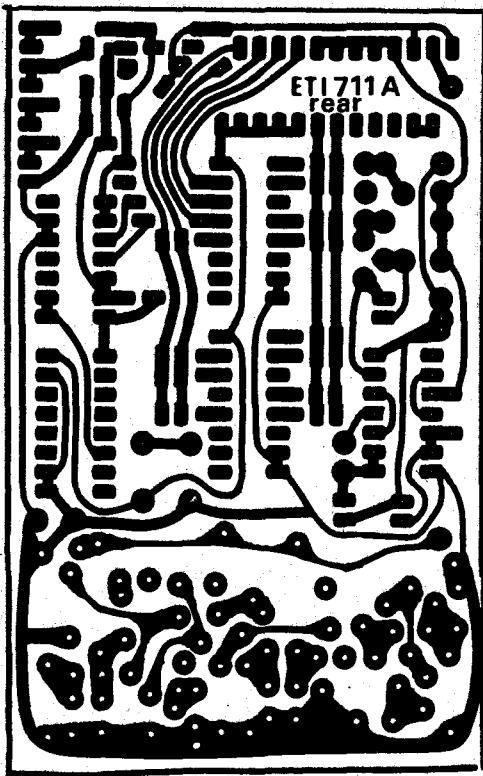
Printed circuit layout for the rear side of the transmitter board. Full size 100 x 62mm
